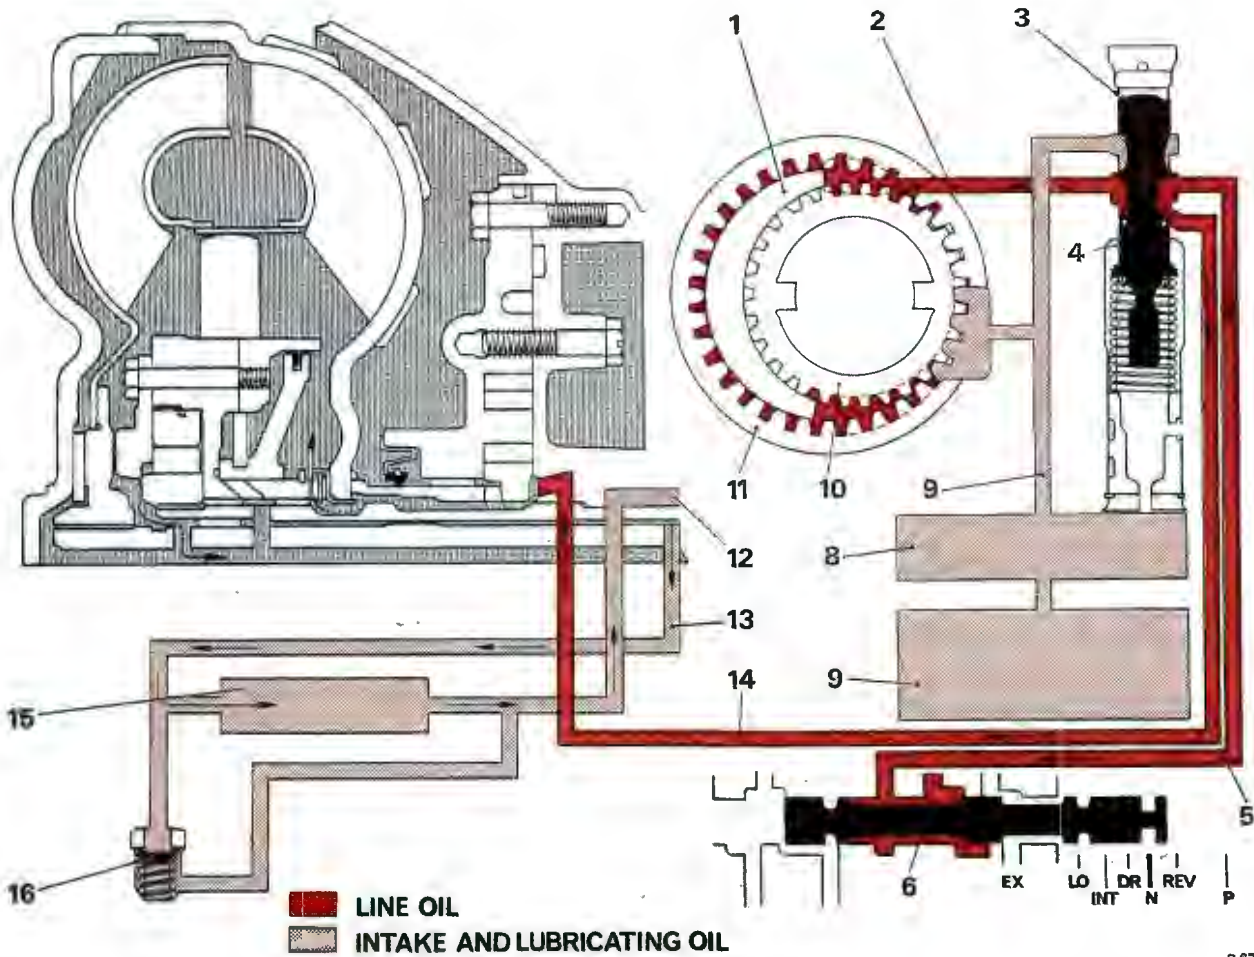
OIL PUMP AND PRESSURE REGULATING SYSTEM
